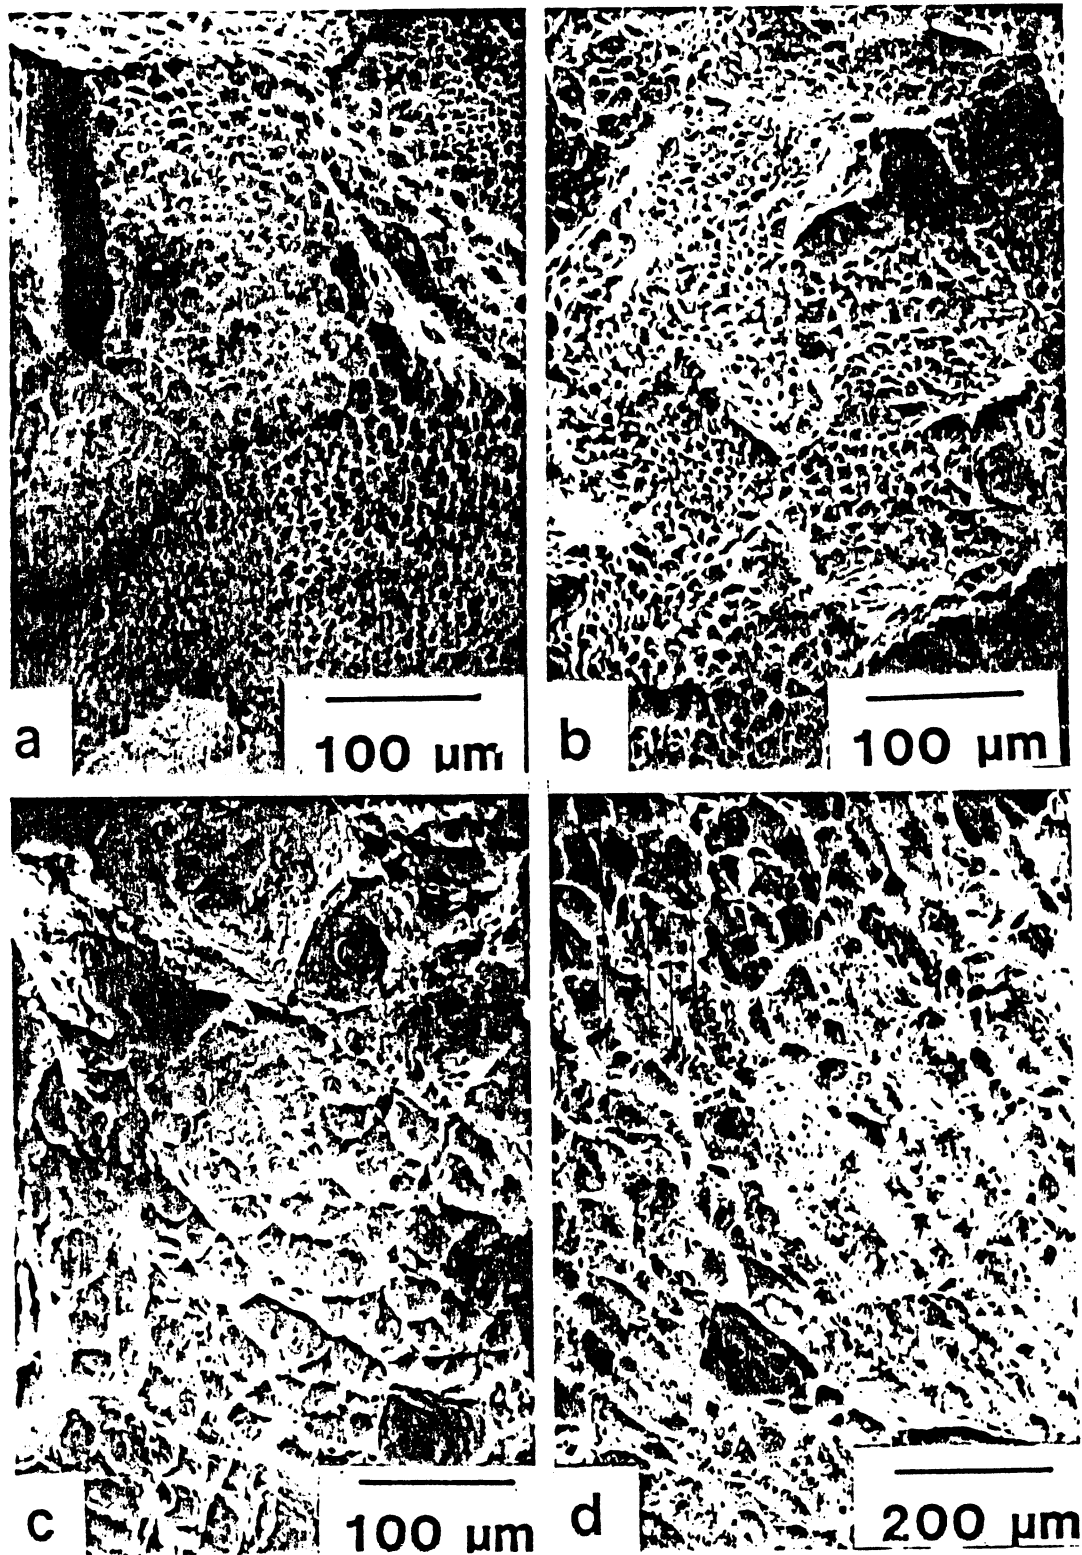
Fractographs of (a) large and (b) medium grained copper specimens impacted at 3.8 GPa pressure showing ductile intergranular fracture mode. Fractographs of (c) small grained and (d) rolled copper specimens showing transgranular dimple mode.
